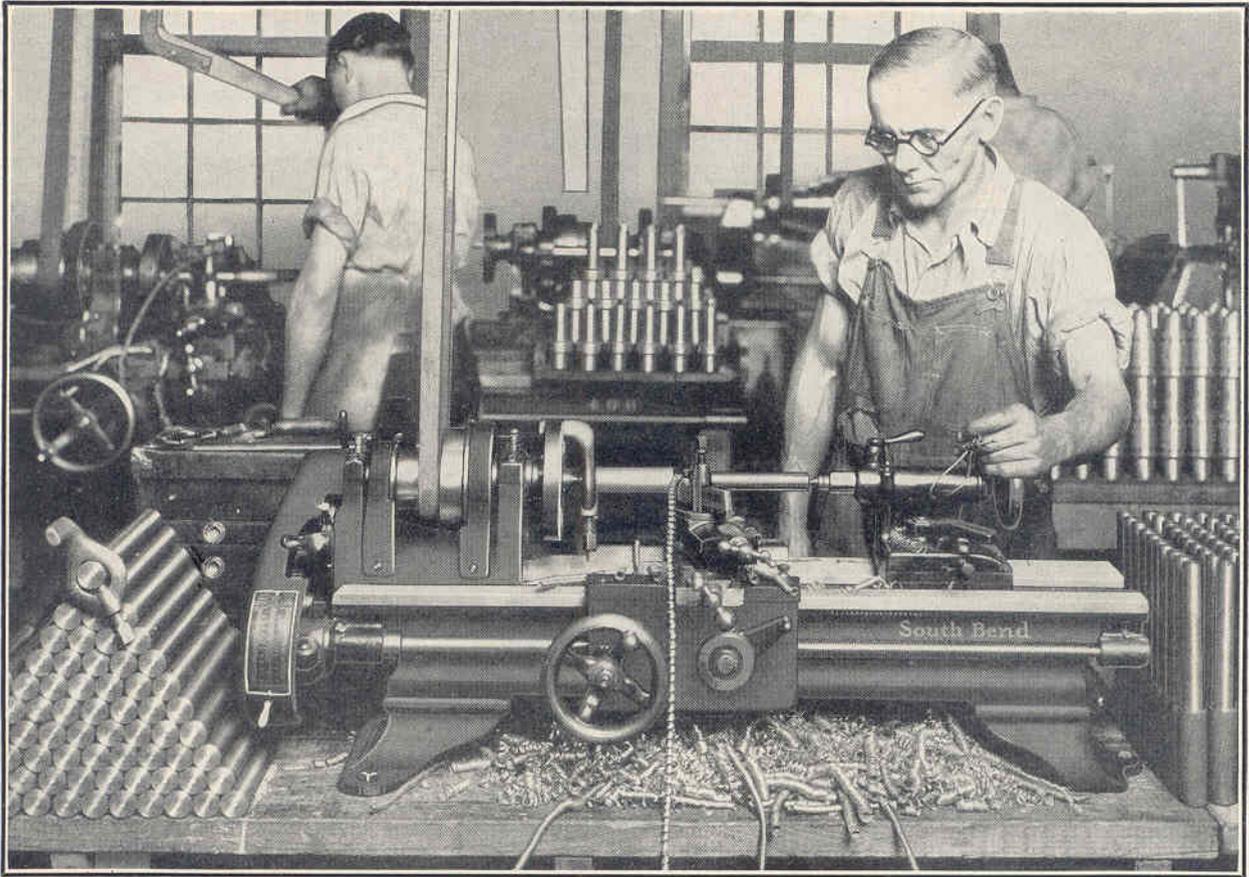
The 9-Inch Junior New Model Lathe on a Production Job in a Manufacturing Plant.
